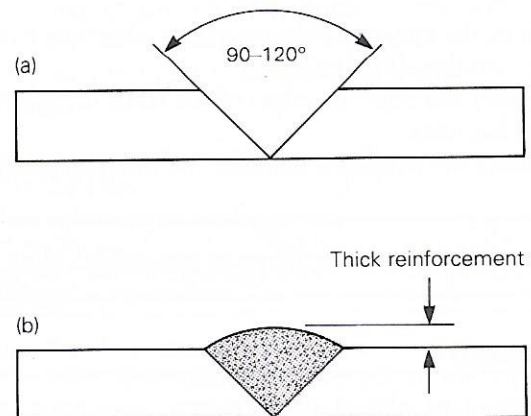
Braze welding joint: (a) preparation of vee joint; (b) completed joint.
